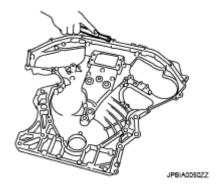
Removing Traces Of Liquid Gasket From Front And Rear Timing Chain Cases Using Scraper
